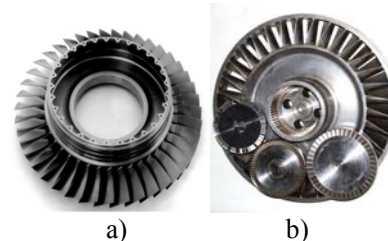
Compressor blisk of a gas-turbine engine (a) and working disks of a turbopump (b)
